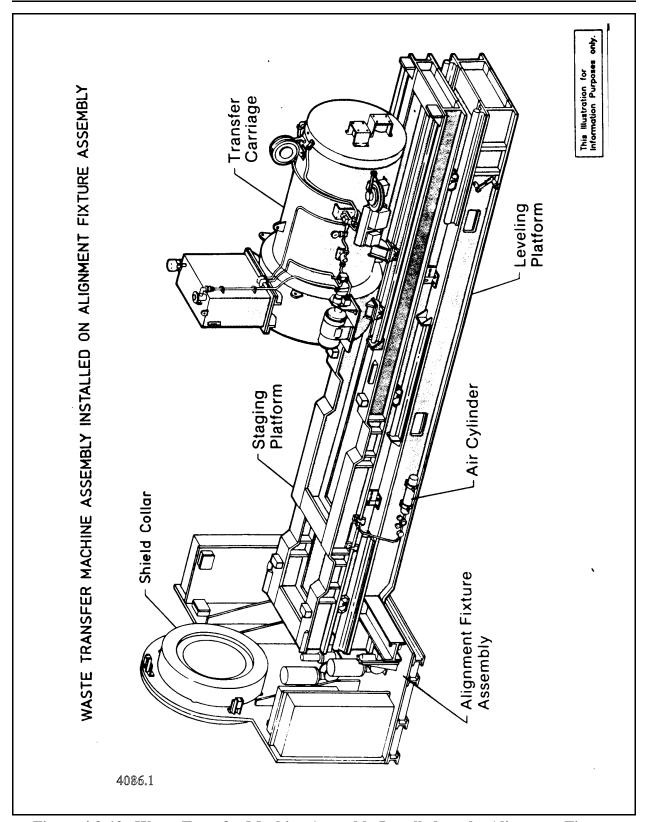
, Waste Transfer Machine Assembly Installed on the Alignment Fixture
